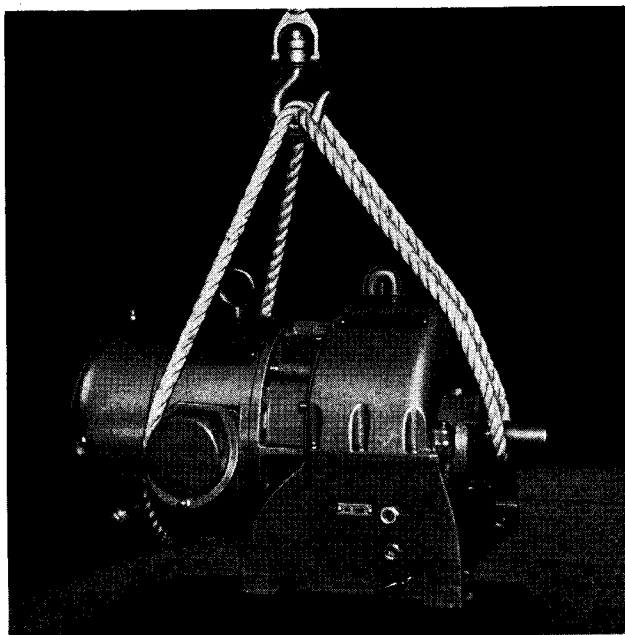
Correct Method of Attaching Sling for Handling Gearmotor.
